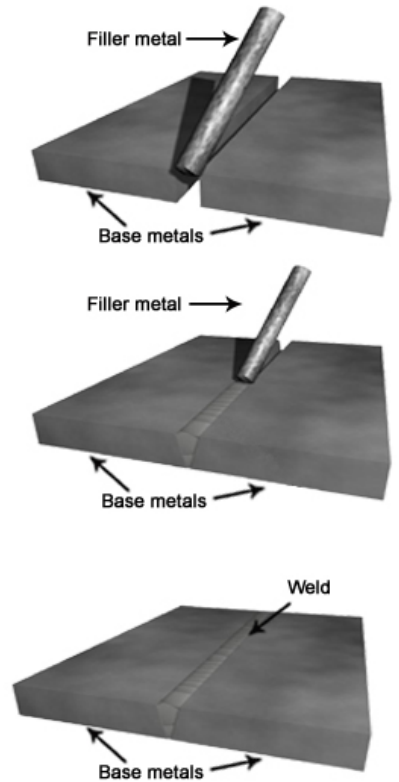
A fusion weld often melts the base metals and a filler metal to create one new part.
